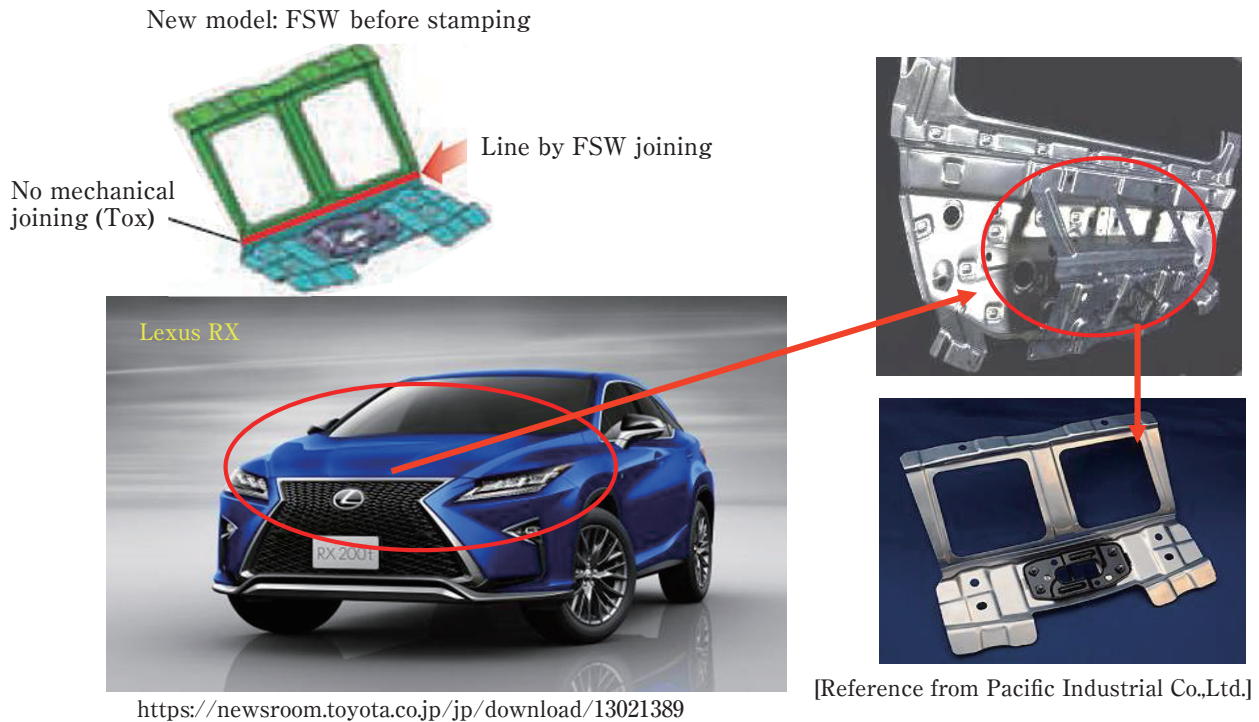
Tailored blanking aluminum sheet welded by FSW.
